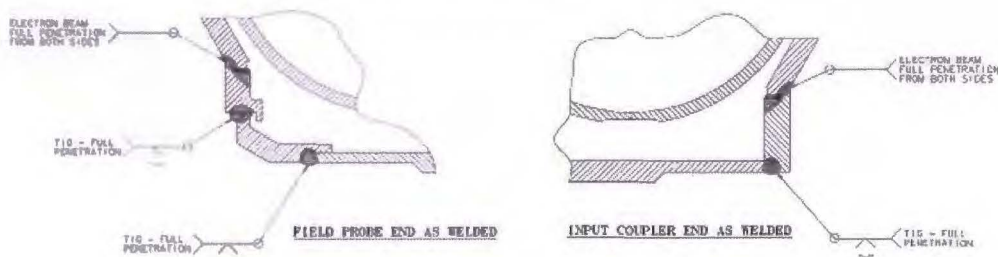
Schemes of the welds that are supposed to be executed between the titanium/niobium end-cap and the titanium disk and between the titanium disk and the titanium shell for the field probe end and the coupler end of the 1.3GHz Helium vessel
